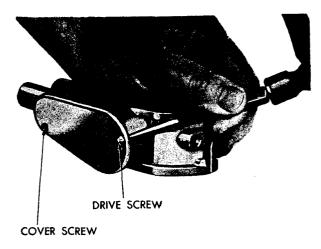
King-Seeley Governor Adjusting Wrenches
